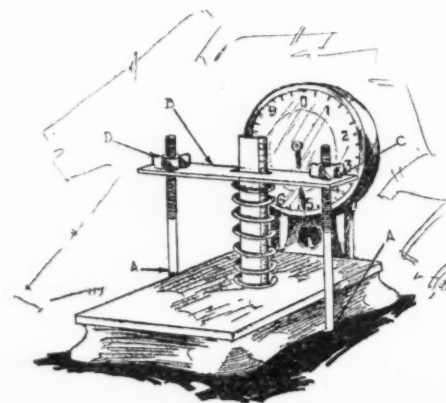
Simple method for testing valve spring tension by means of a platform scale
